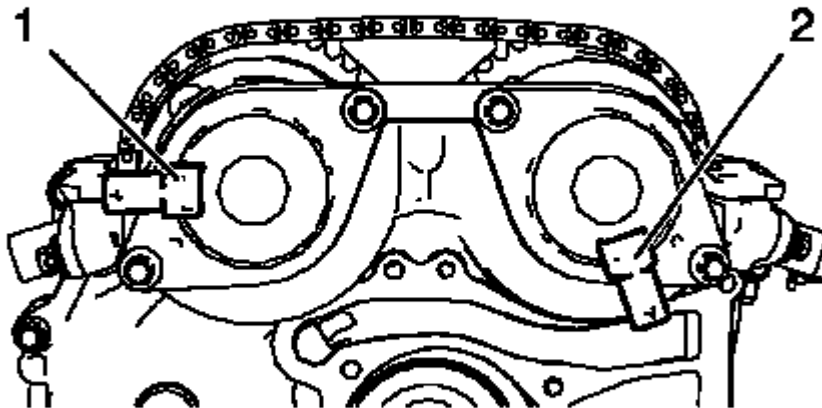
Camshaft Position Actuator Solenoid Valves Proper Position
